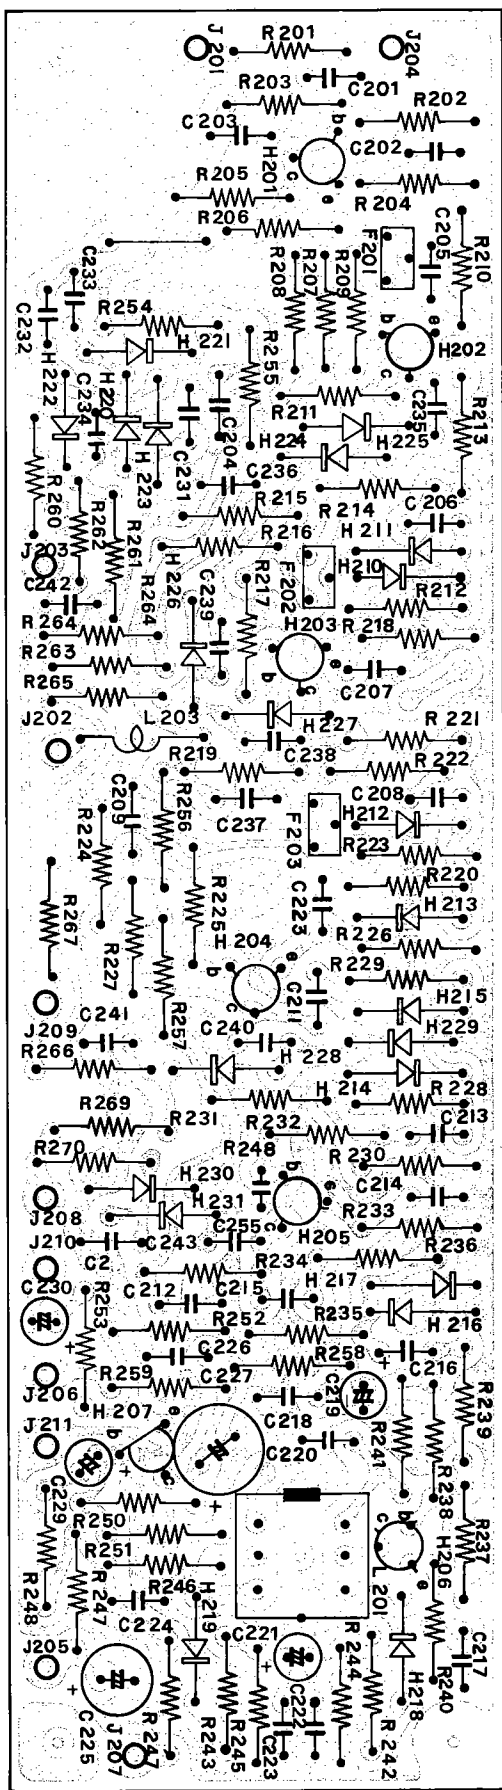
FM IF Amplifier Assembly P200 Component Locations
